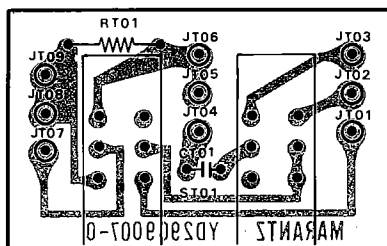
Mono HI Blend Assembly PT01 Component Locations
